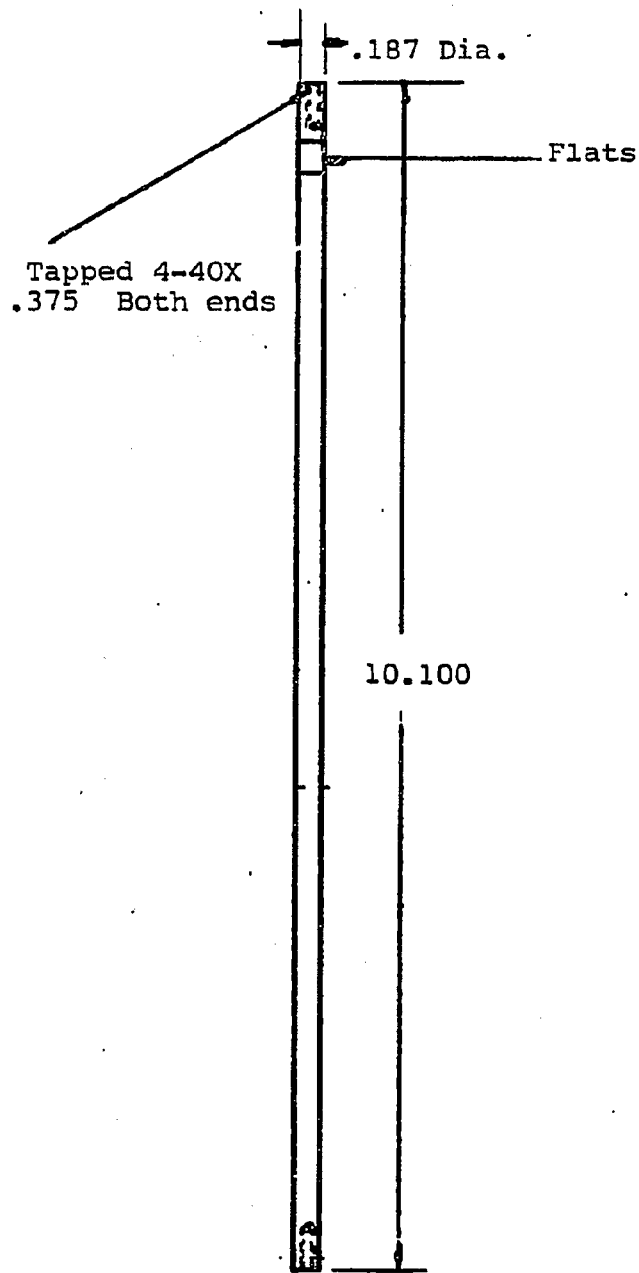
The OHFC copper stack assembly rods (see Photographs A.40,41).
